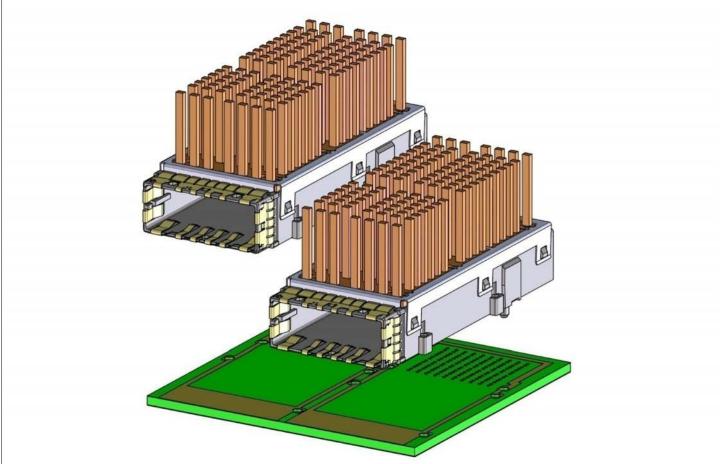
Style 2 Cage and Optional Heat Sink Design (exploded view)
